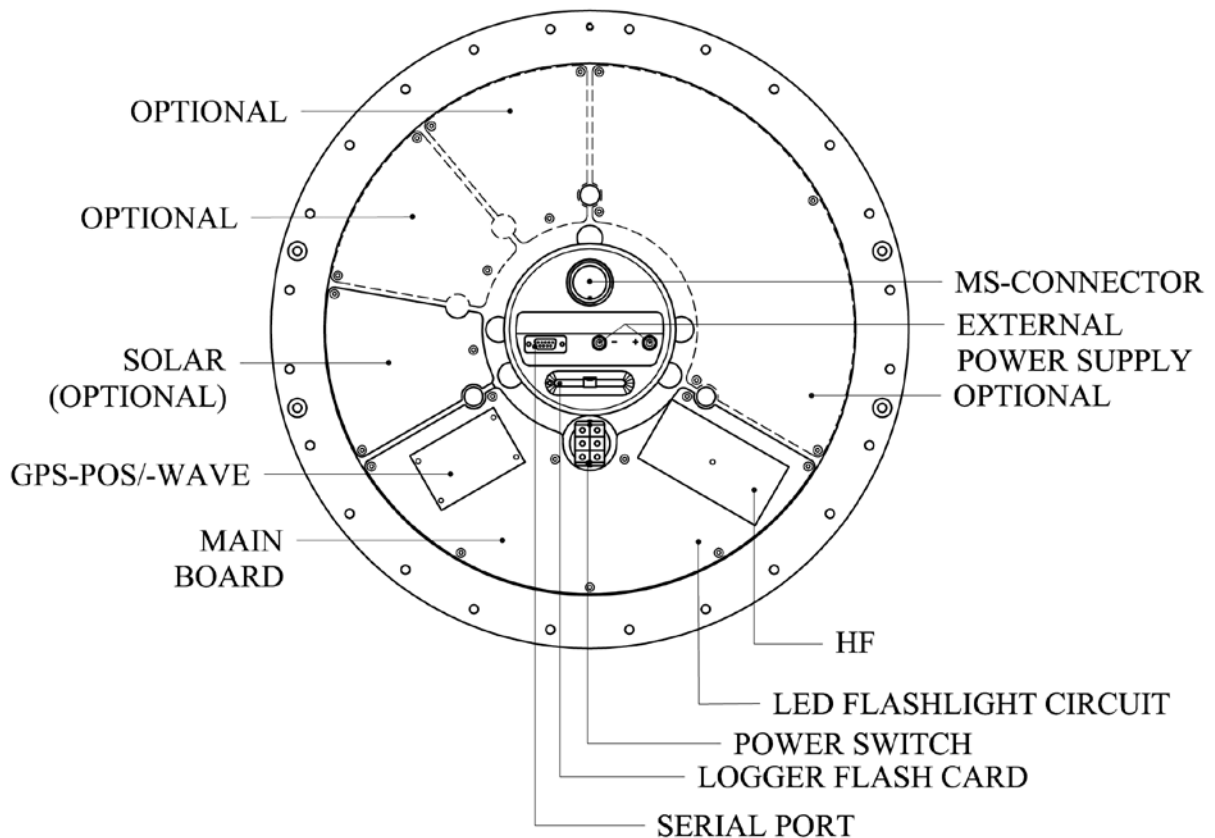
Schematic drawing of the printed circuit boards (pcb) on the inside of the electronics unit and the connector block in the middle.
